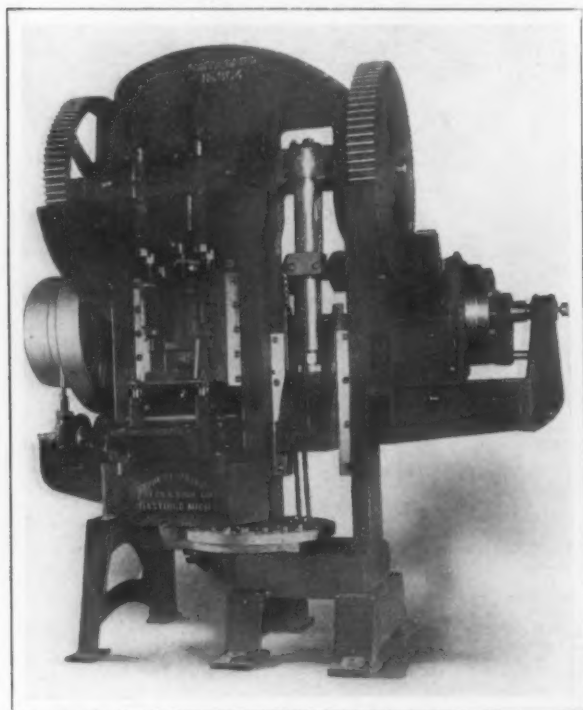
Front View or Feeding Side of Automatic Combination Drawing Press
